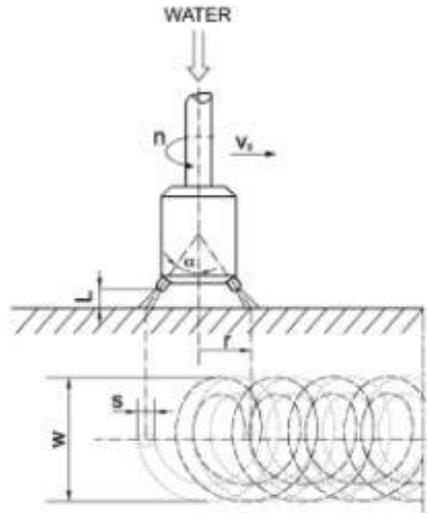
Flat Surface Treatment Using Rotary Head Equipped with two water nozzles
